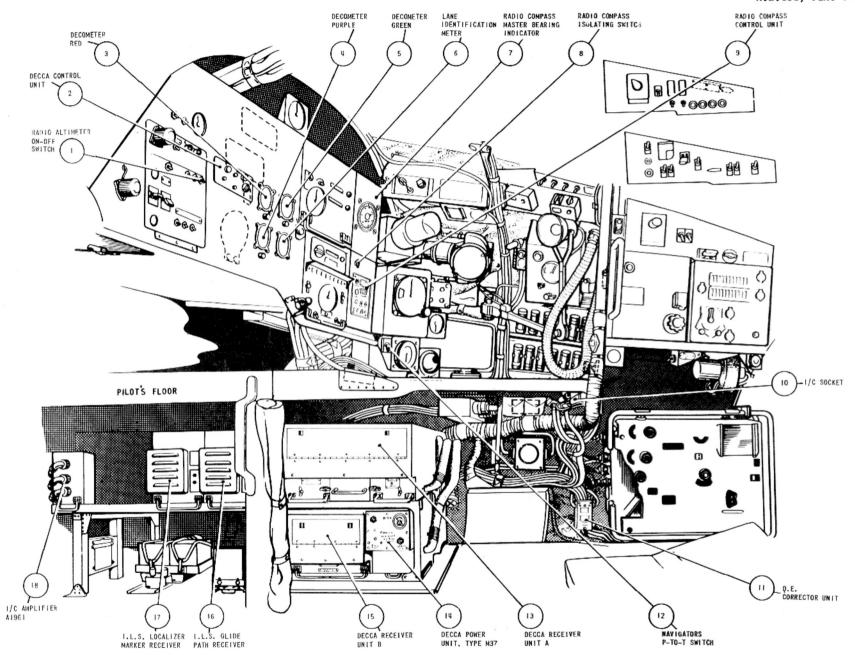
WIRELESS INSTALLATION - NAVIGATOR'S STATION (PORT)
